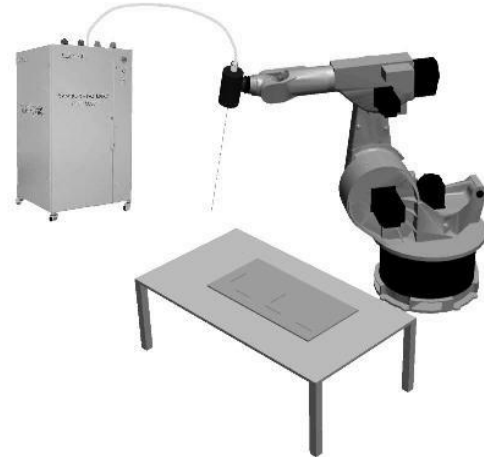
scheme of the set-up for scannerless remote welding with a robot²⁵
